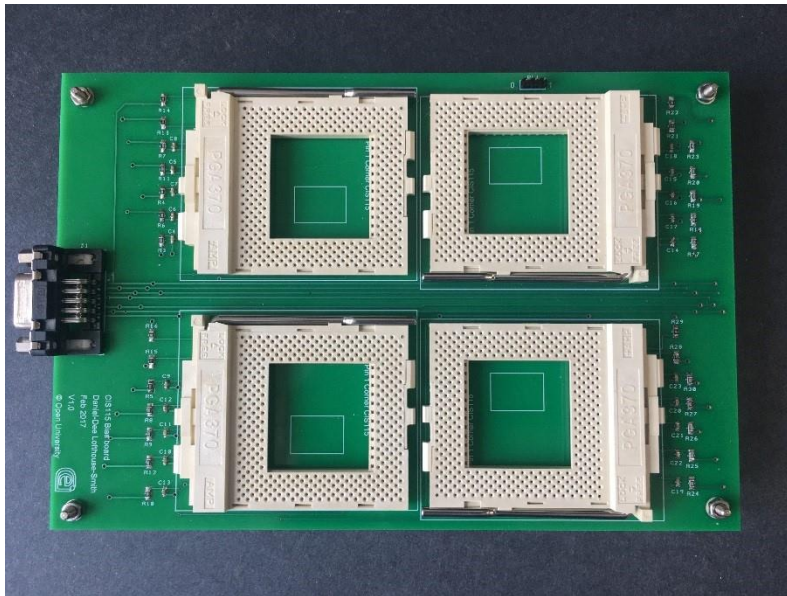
Bias board designed in DesignSpark® PCB and populated at The Open University. Modified 370-way socket were used to connect to the CIS115's package pins.
